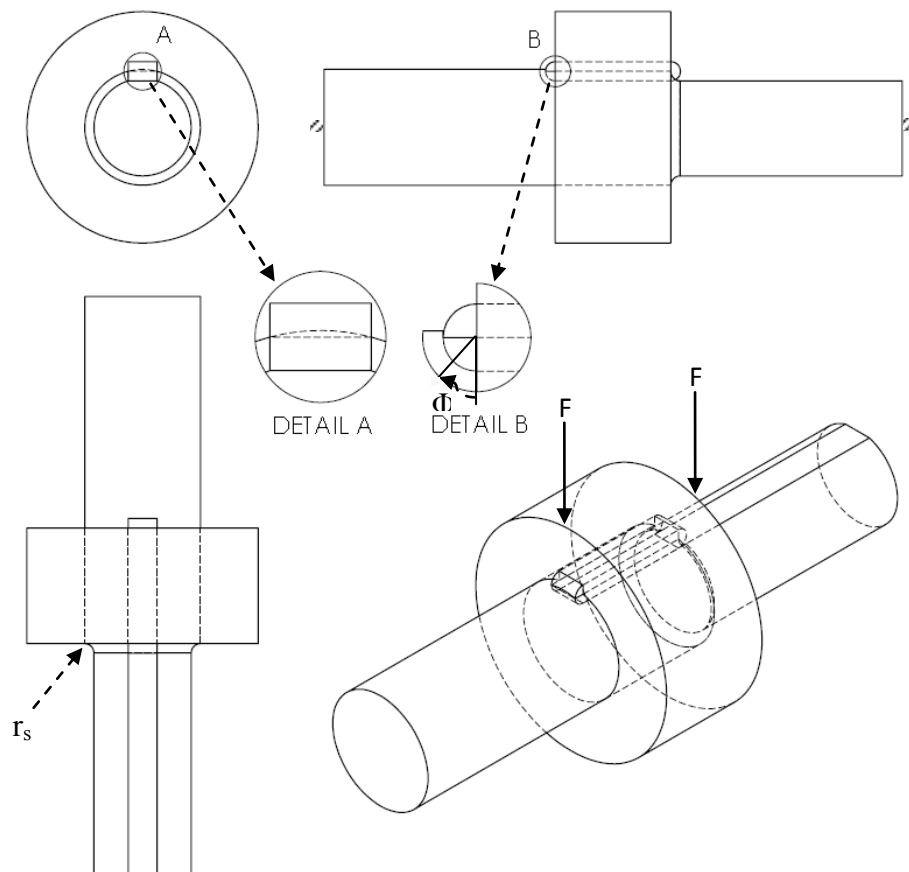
Bending model of hub, key and a stepped shaft with sled runner keyway
